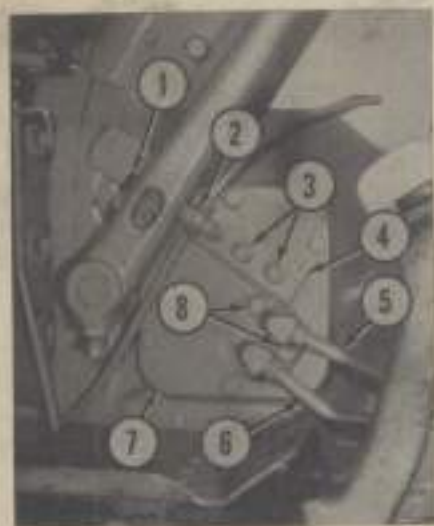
View of right hand side of torque housing showing "Power-Director" clutch lever, clutch cover and related parts. Shuttle clutch equipped tractors may have control lever on the opposite side of torque housing. Adjustment procedures remain the same, however.
